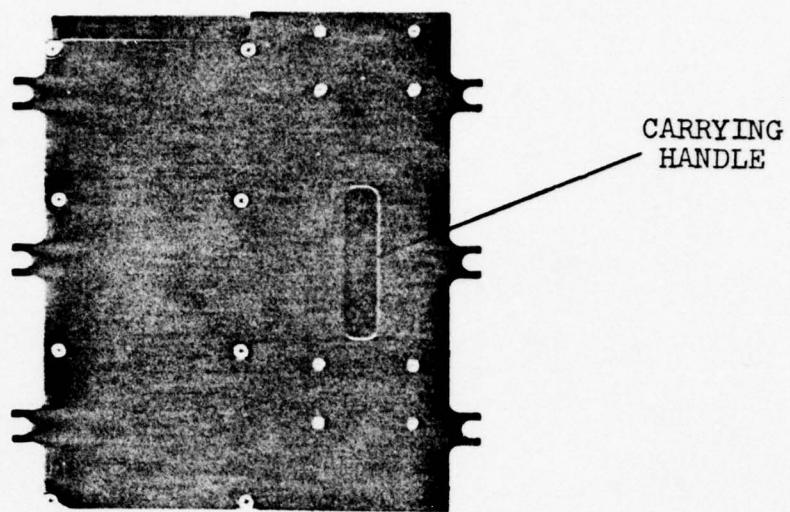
Mounting Plate Assembly (A20) and Radio Harness Assembly (A50)
